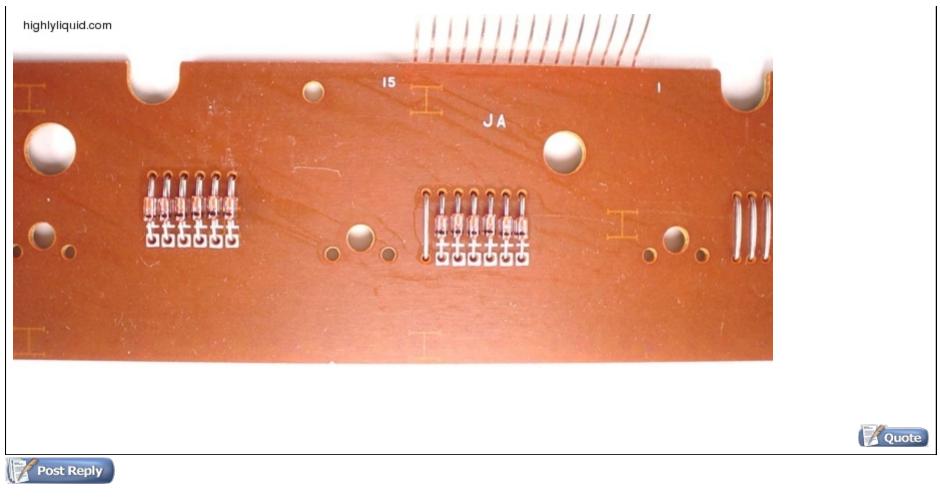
Casio MT-210 Keyswitch PCB—Bottom
